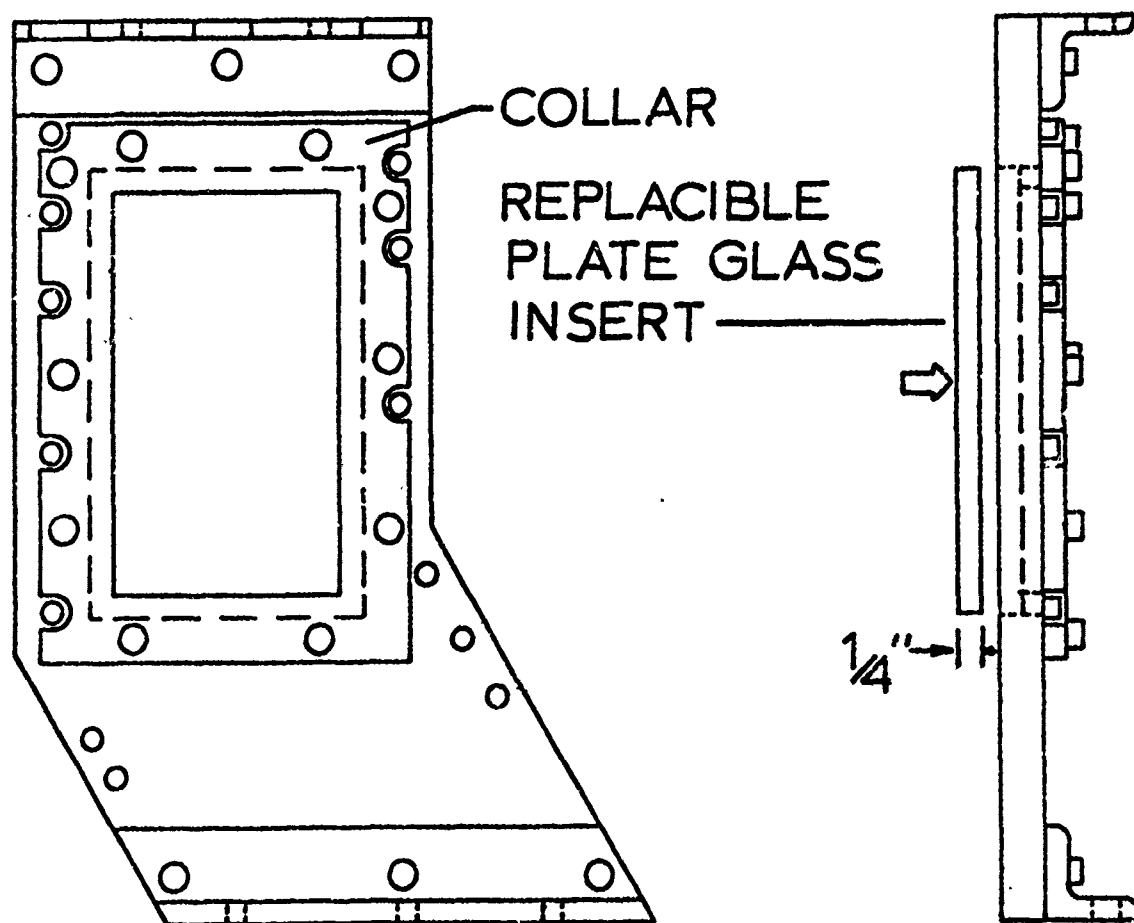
TEST SECTION PHOTOGRAPHIC INSERT
